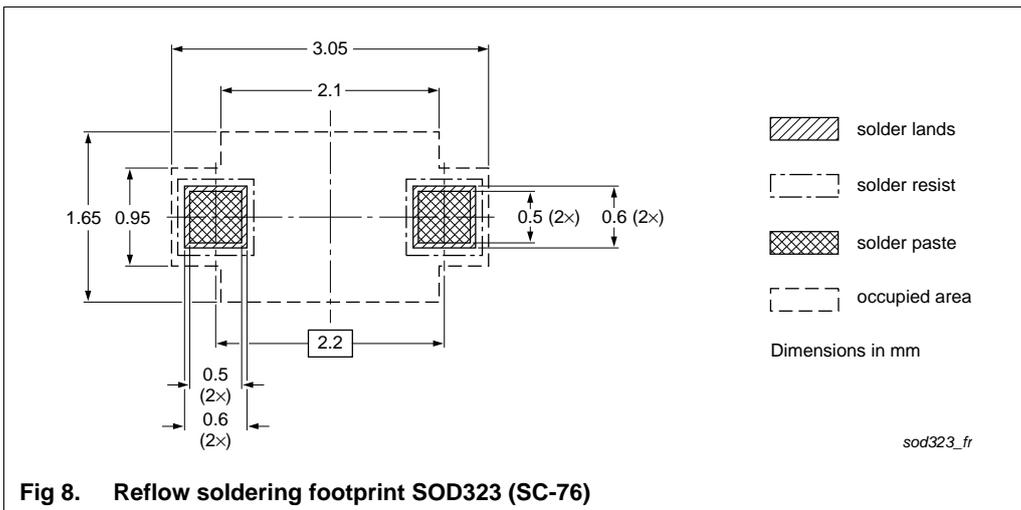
Reflow soldering footprint SOD323 (SC-76)
